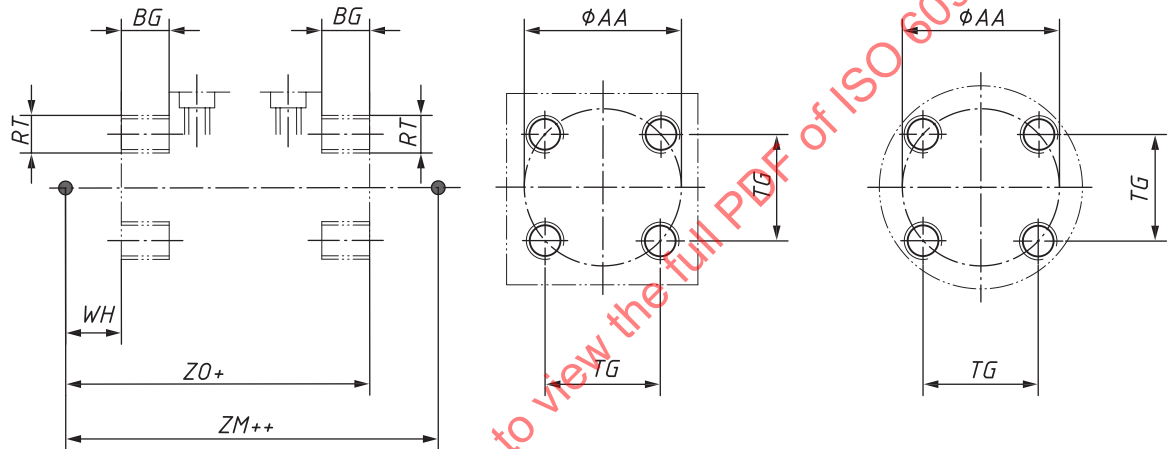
MDX8 — Head and cap, tapped — Double rod
